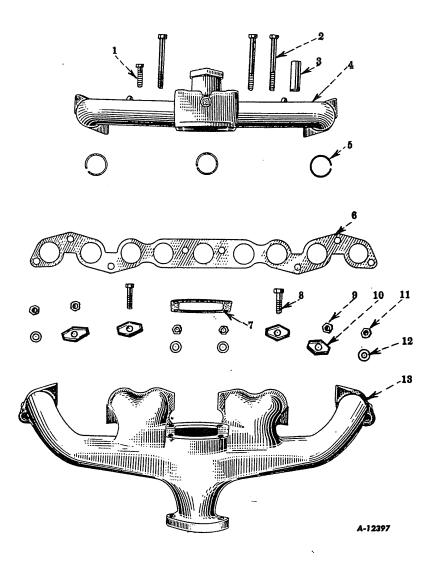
ENGINE INTAKE AND EXHAUST MANIFOLDS
